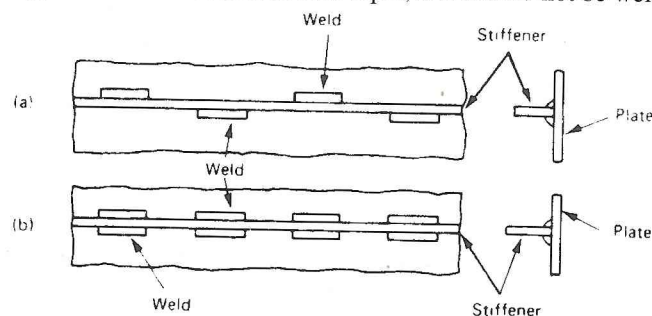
Non-continuous fillet welds: (a) intermittent welding;
